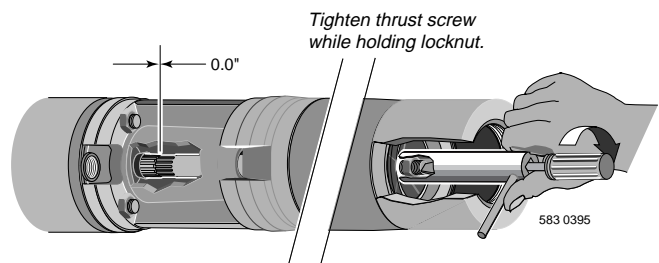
Back off thrust screw 3/4 to one turn, giving .045" to .060" clearance between shafts.
